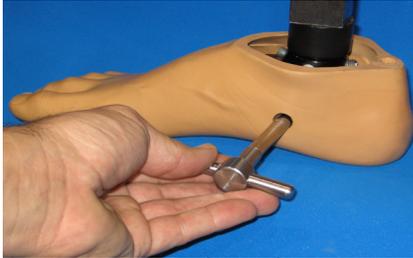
A: Pushing the axis assembly through the ankle joint.
